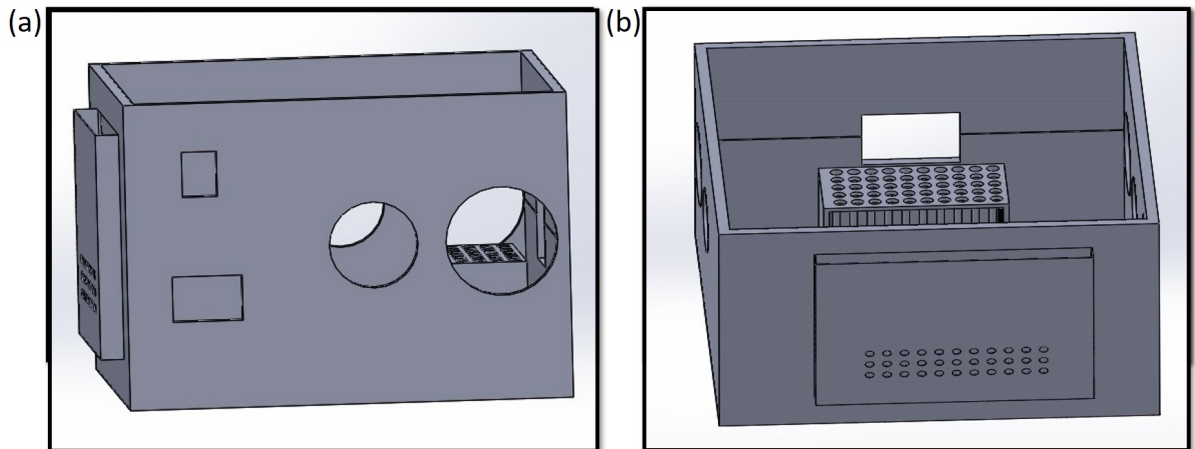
Laser box: (a) side view of the laser box designed in SOLIDWORKS., (b) rear view of the laser box designed in SOLIDWORKS.
